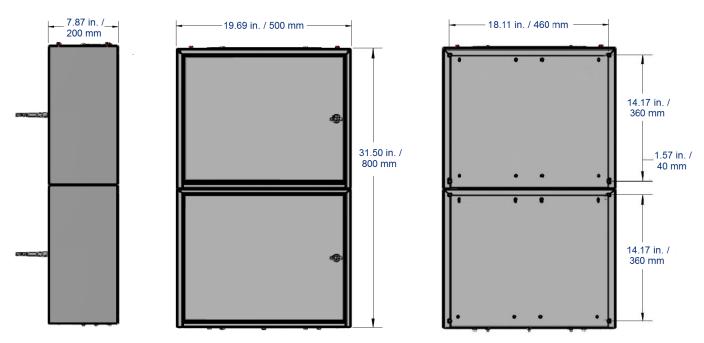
DOUBLE SK Enclosure Overall and Mounting Dimensions
